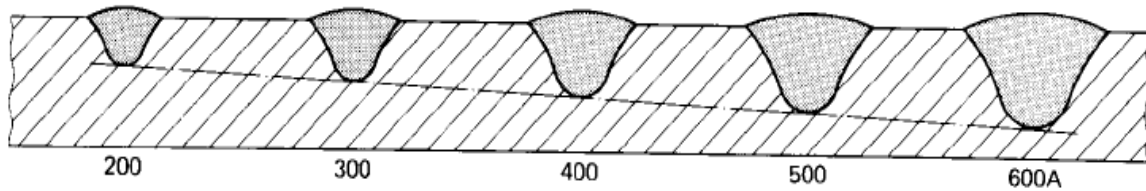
Effect on the weld due to welding Current (I).
